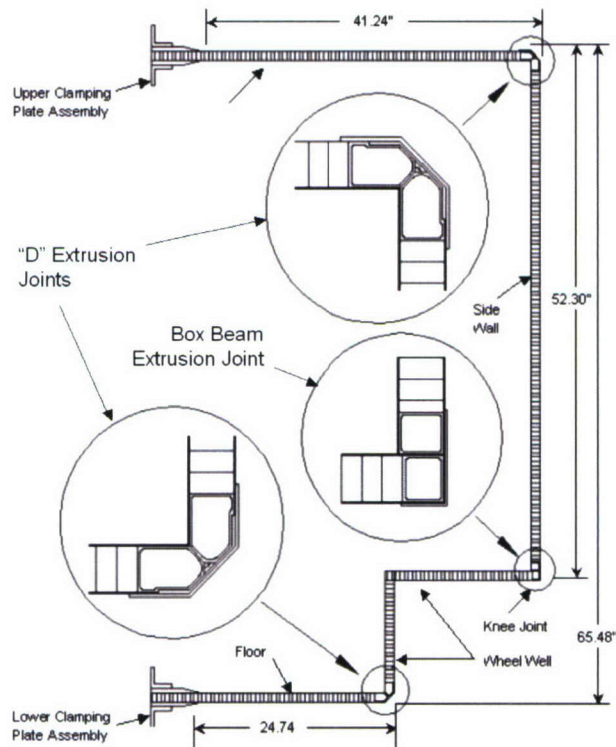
Cross-Sectional View of Representative Shelter Test Section
